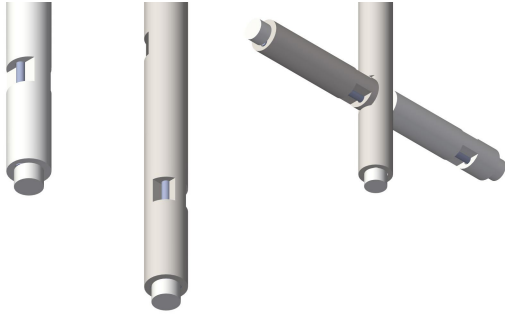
Mach Probes: from left to right: single parallel flow probe, double parallel flow probe, double perpendicular flow probe
